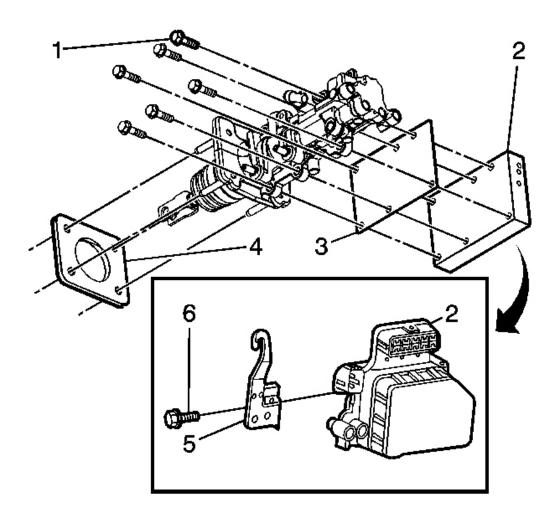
View Of Brake Pressure Modulator Valve & Bolts Courtesy of GENERAL MOTORS CORP.
